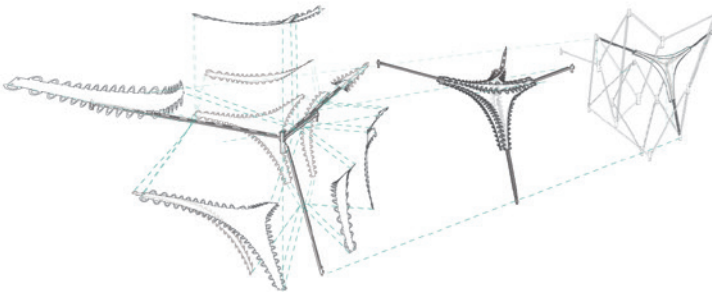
Cast Thicket: Exploded axonometric drawing describing assembly process.
